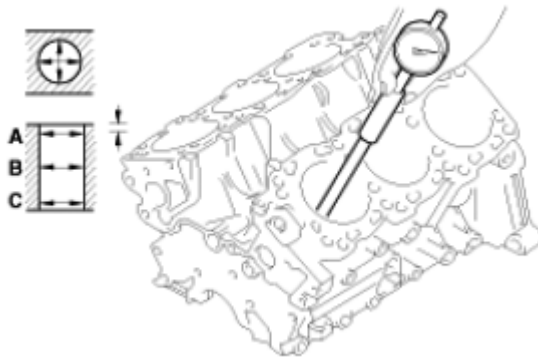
Measuring Cylinder Bore Diameter At Position A, B And C In Thrust And Axial Directions
